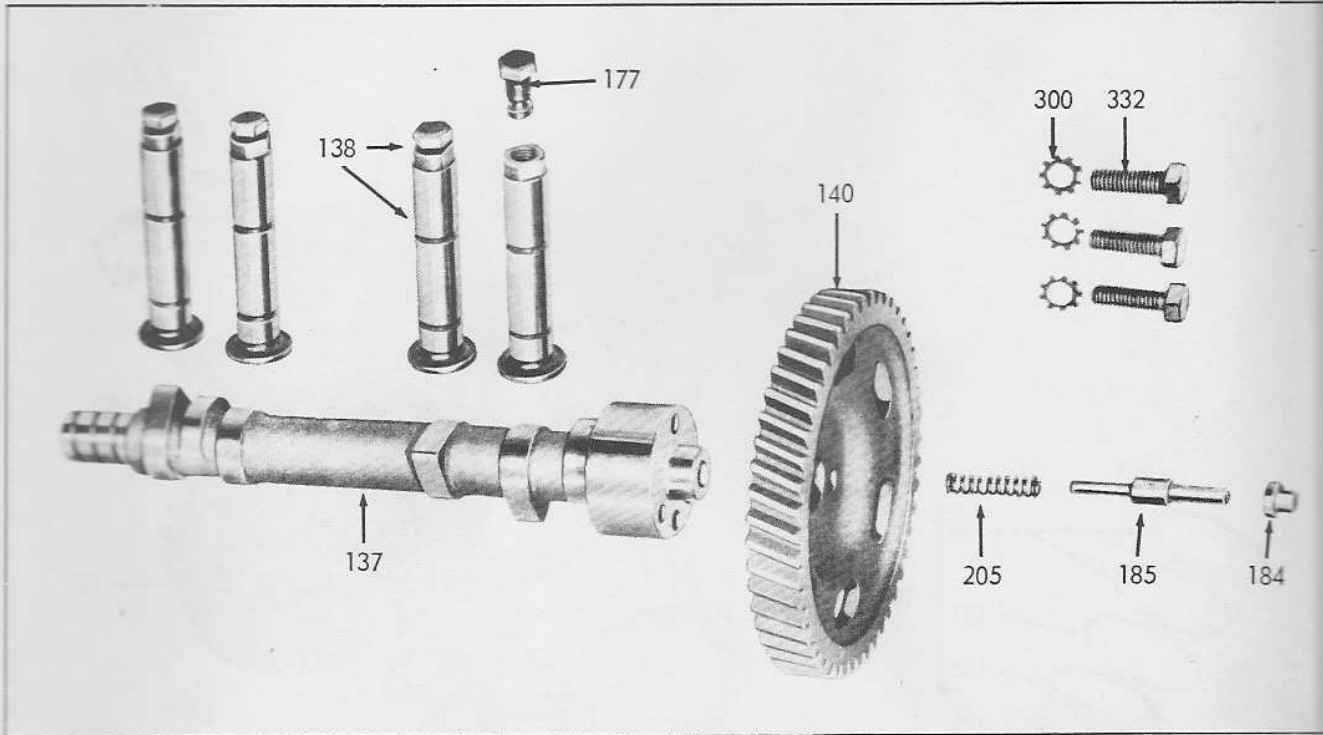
, CAMSHAFT AND VALVE TAPPET GROUP
